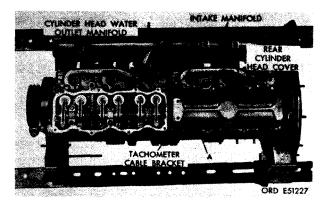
INSTALLING REAR CYLINDER HEAD COVER.
